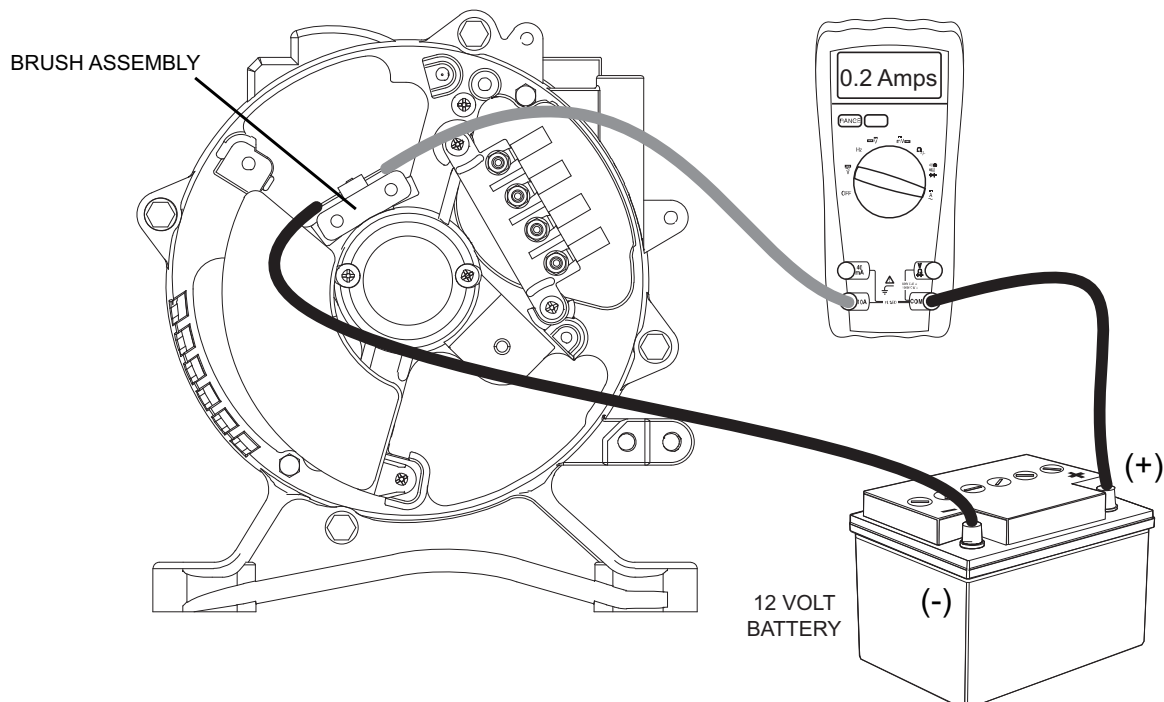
Jumper Wire and DMM Between Battery and Brush Assembly
